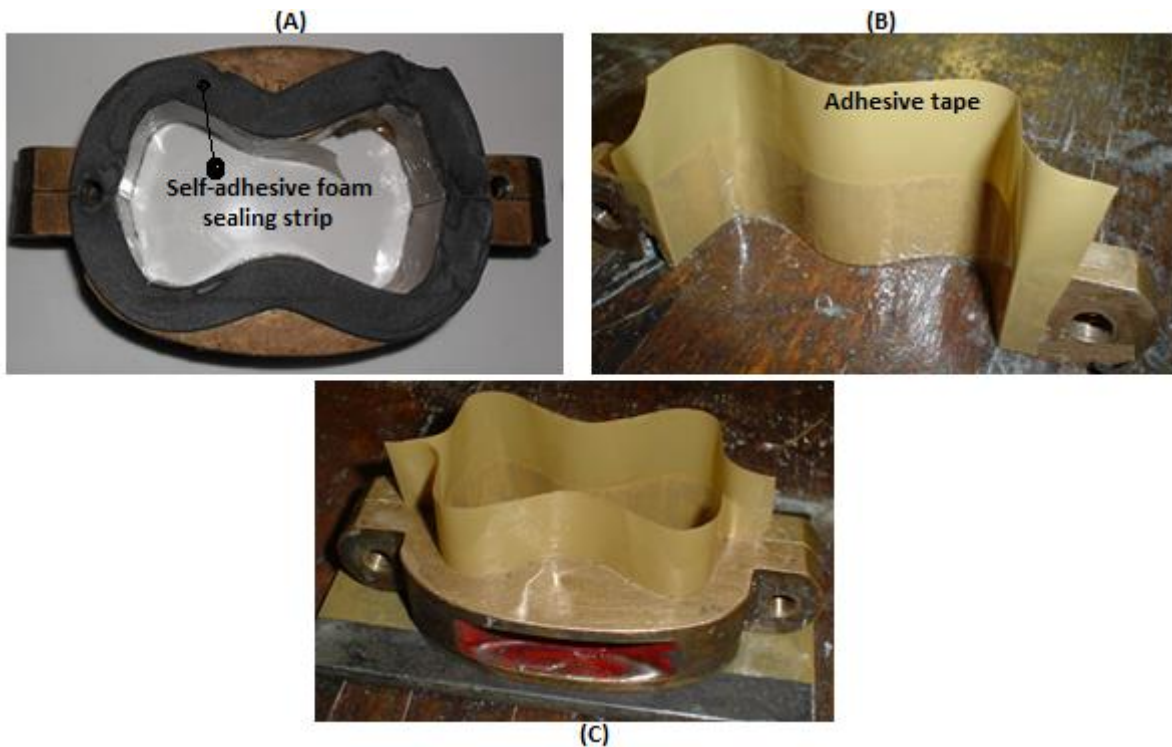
Mould preparations. (A): Foam sealing strip stuck to the lower surface of two halves parts. (B): Inner surface overlaid by adhesive tape. (C): Complete mould.
